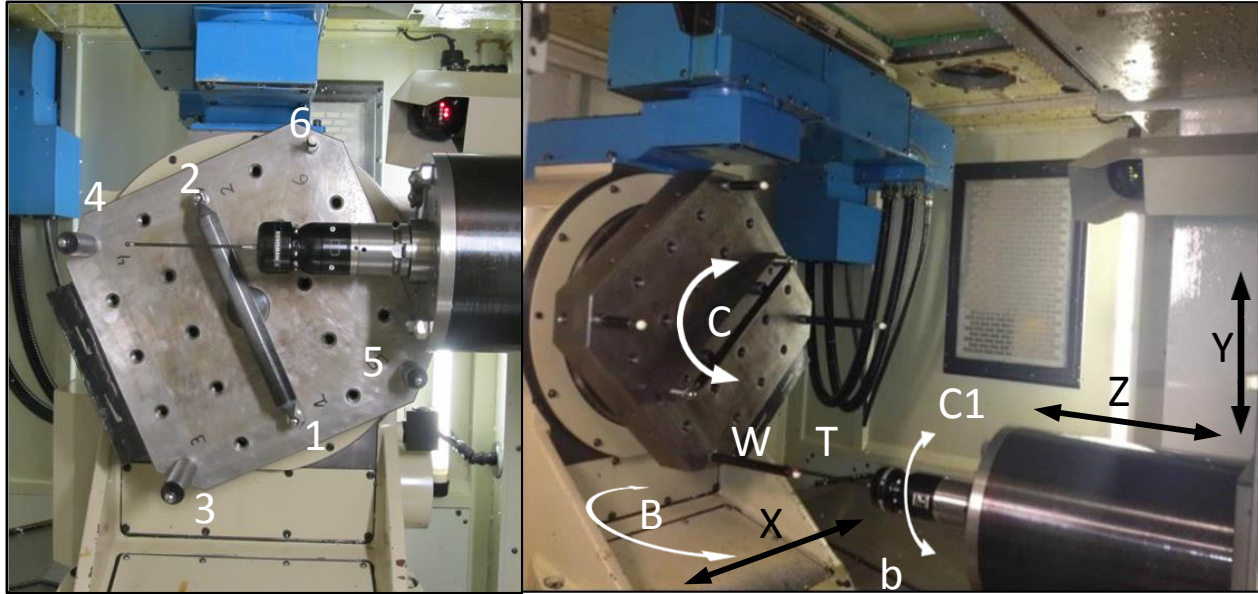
SAMBA artefact being probed using the touch trigger probe on the Mitsui Seiki HU40-T machine tool with the topology WCBXbZY(C1)T; W – workpiece, T – tool, b – machine bed, B, C – rotary axes around the Y and Z axes respectively, X, Y, Z – machine linear axes, C1 – spindle
